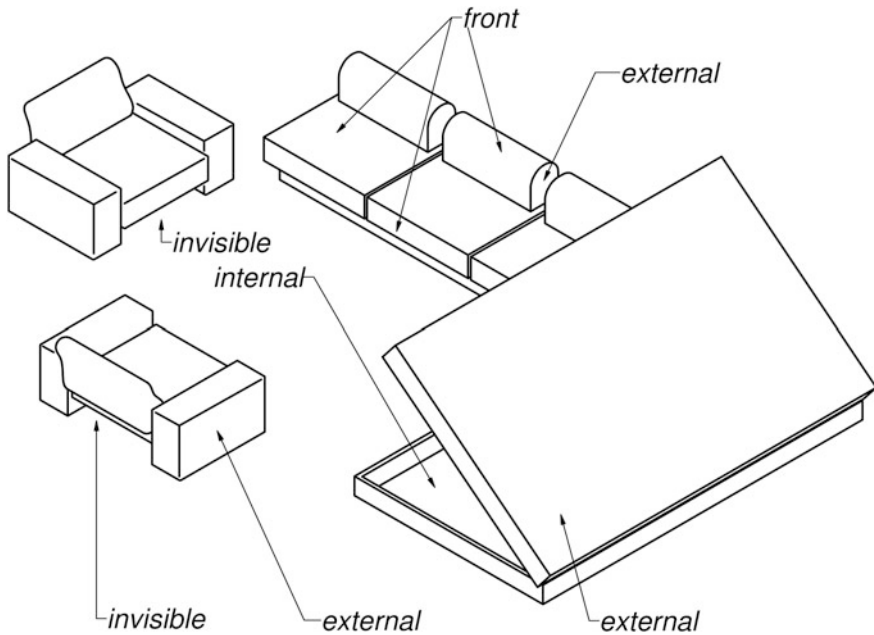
Types of surfaces in an upholstered furniture piece
